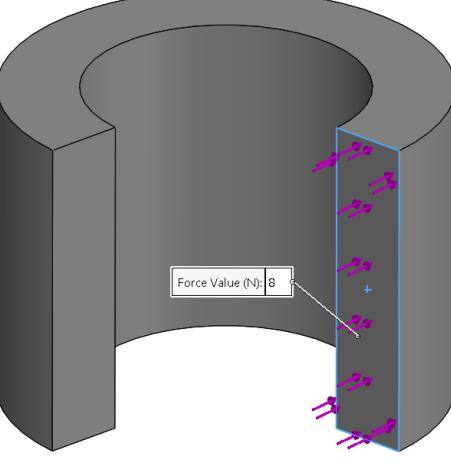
CAD model of the Portal assembly and the C-Ring
